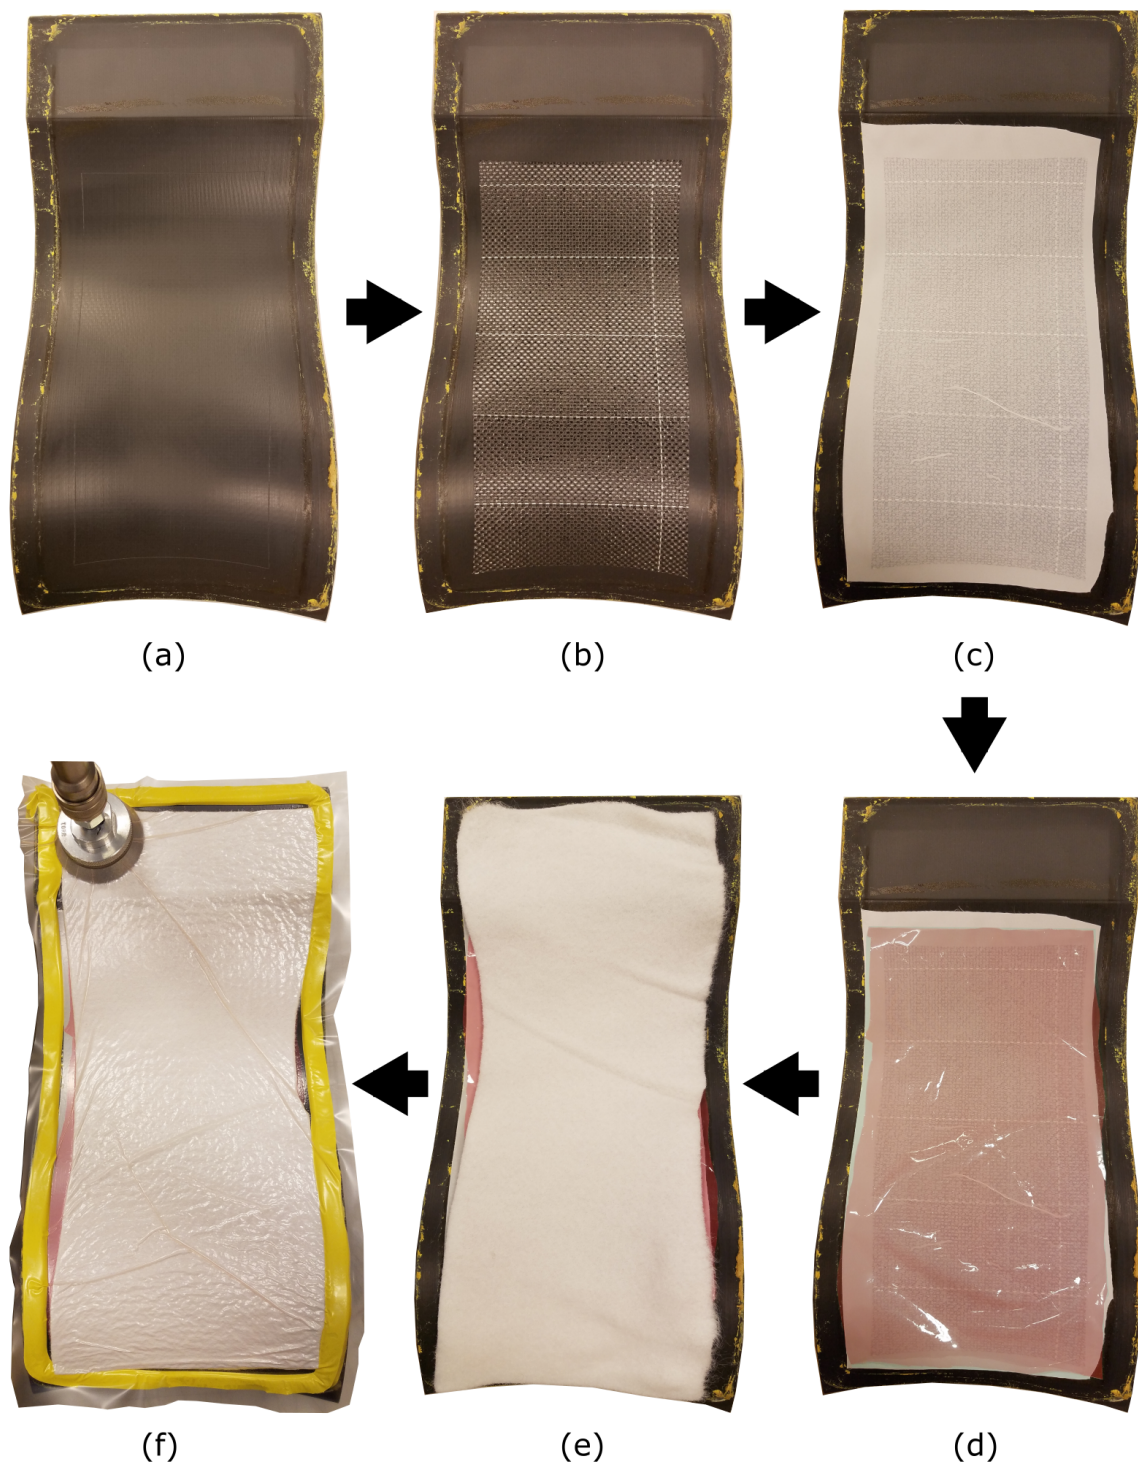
Vacuum bagging process of the mold life experiment tool; (a) mold life experiment tool before layup, (b) after layup composite prepreg plies, (c) peel ply, (d) release film, (e) breather cloth, and (f) vacuum bag.
